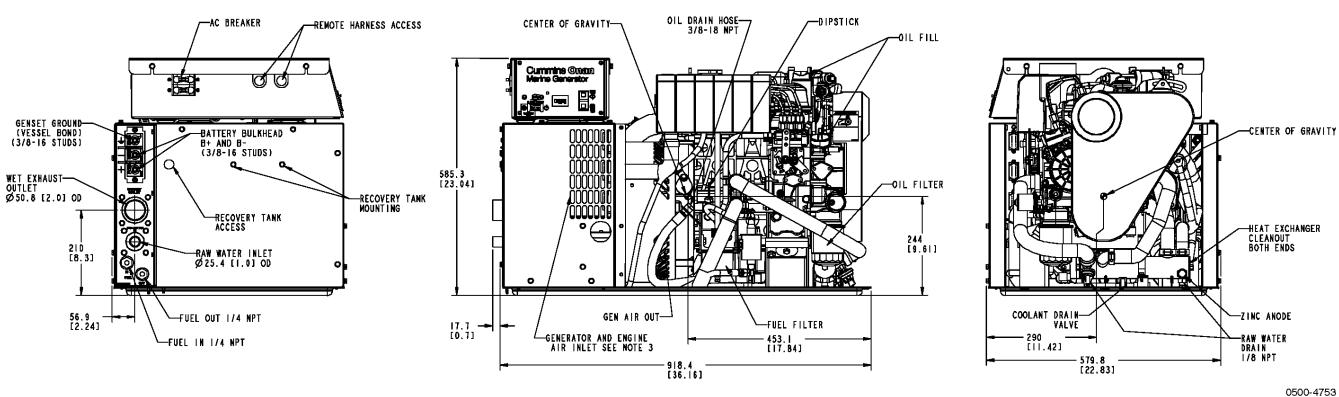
MDKBL OUTLINE DRAWING (SHEET 2)
